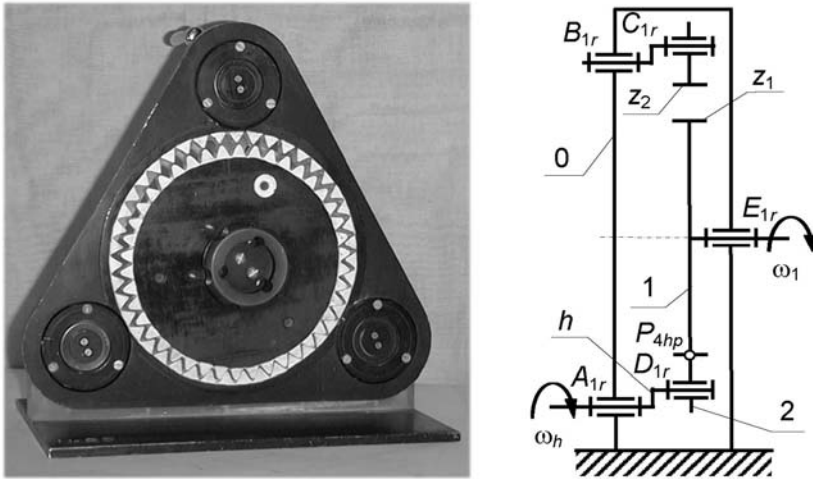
Model of crank-planetary reducer with mechanism of parallel cranks with lower pairs as its muff
